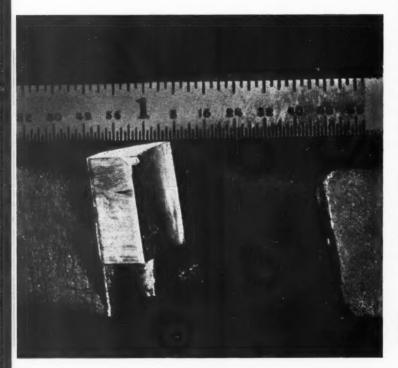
Milling cutter tooth damaged in machining titanium at a cutting speed of 720 feet per minute. Best results were obtained with a speed of about 90 feet a minute
